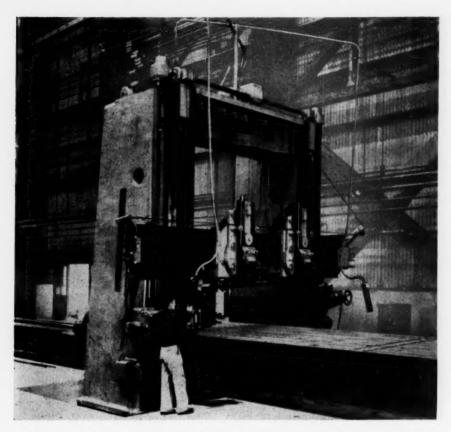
The planer shown here has a table travel area of 44 feet, overall bed length of 92 feet, and width between the double housings of 122½ inches.
